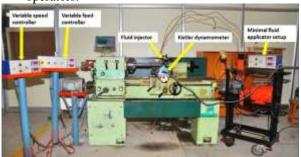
Experimental setup containing lathe and minimal cutting fluid applicator
